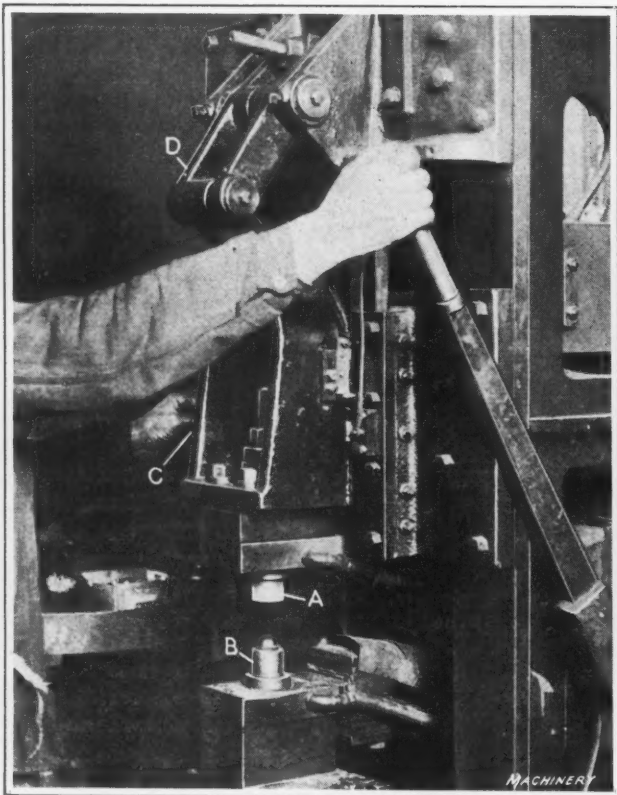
Operation of Butt-welding the Two Hemispheres from which the Hollow Caster Ball is made
